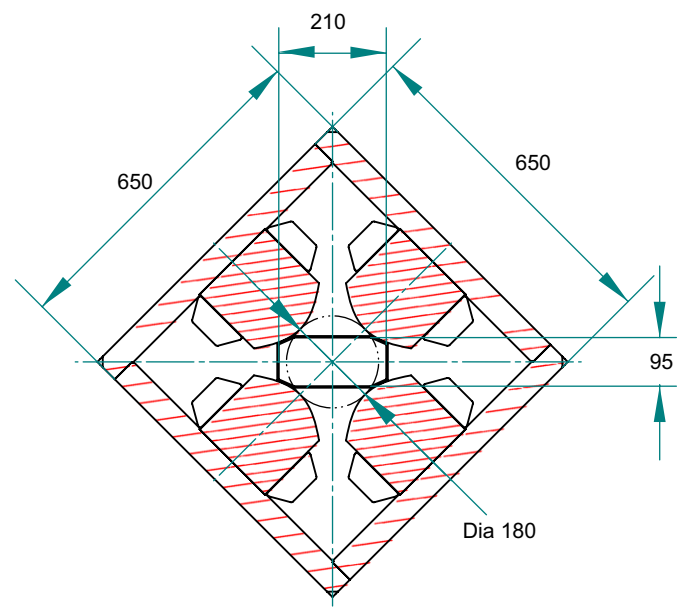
Cross-section drawing of the quadrupole magnet Q10 including the vacuum chamber.
